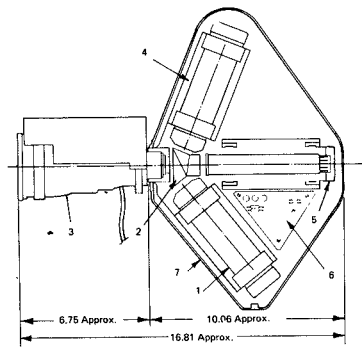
Outline of the 3-tube camera configuration: 1) vidicon yoke shield assembly; 2) prism beamsplitter; 3) 25 to 110mm Canon lens; 4) optical faceplate; 5) shield cap; 6) electronic circuit boards; 7) sensor case.
